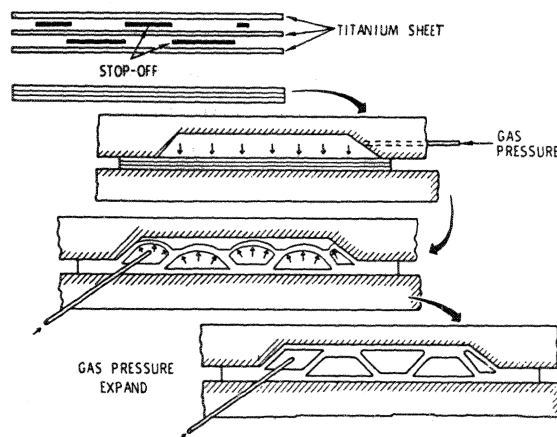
Superplastic forming (SPF/DB process) for sheet parts (From (21), p. 380, Fig. 44).
